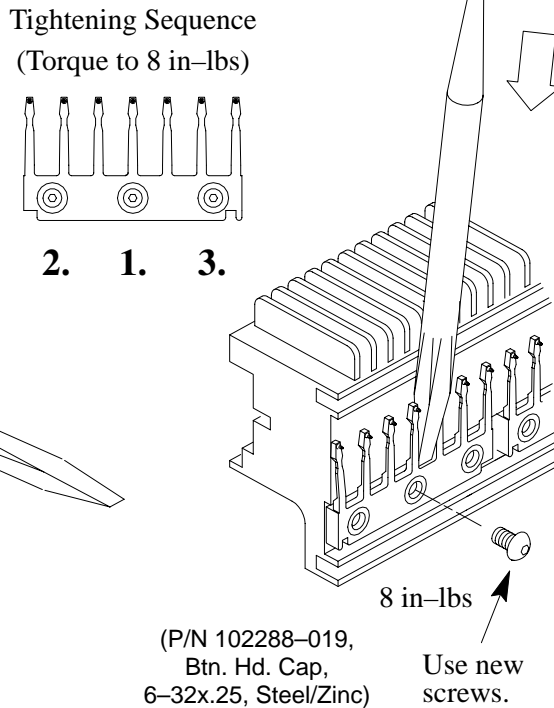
Hammer Spring Assembly Removal/Installation
